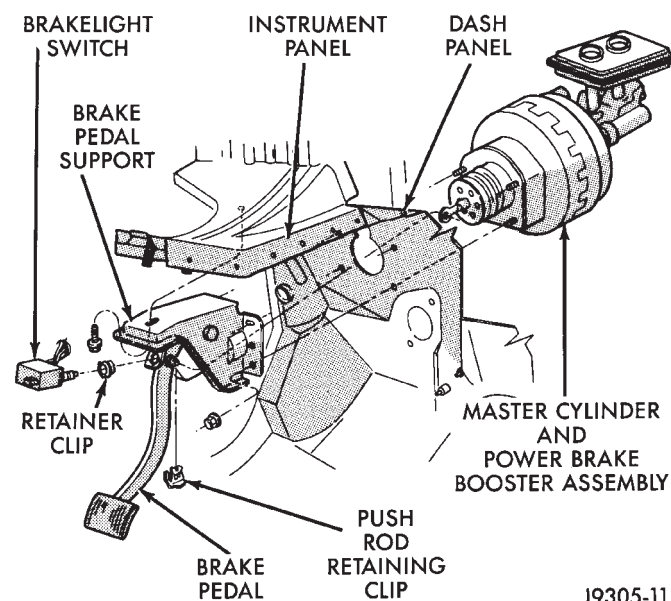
Brake Pedal And Brakelight Switch Mounting
